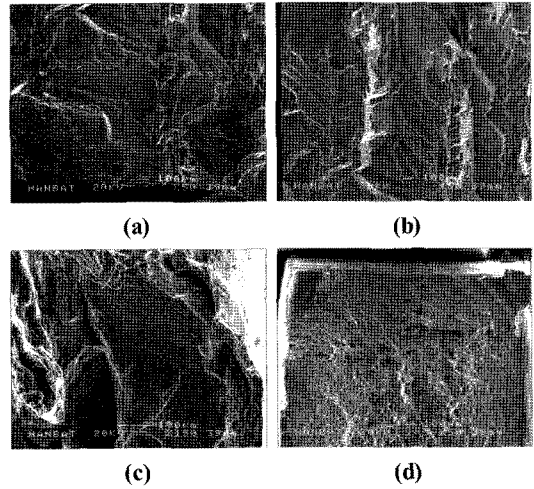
Fractograph of MIG welded fatigue specimens : (a) crack initiation, (b) river pattern of brittle fracture (c) striation, (d) voids in ductile fracture
